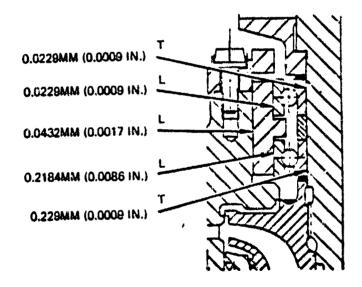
Mark 48-0 Turbopump S/N 03-0 Bearing Diametral Clearances and Fits
